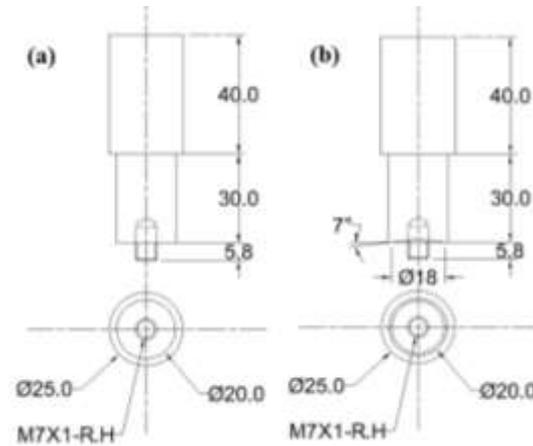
Schematics of the FSW tool used with (a) full flat shoulder, (b) 1mm flat and then 7° concave towards the centre
